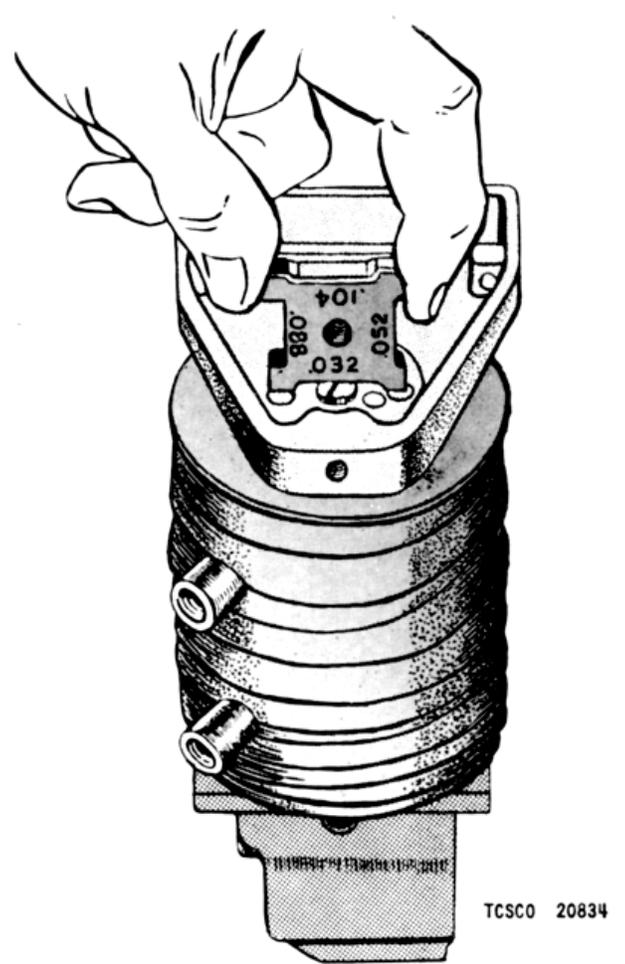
Open coil "On" type magnet valve, gage in proper place for checking valve stem travel.
